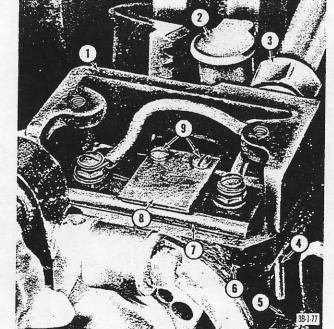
Shuttle driver and awl segment oiler, exploded view.
